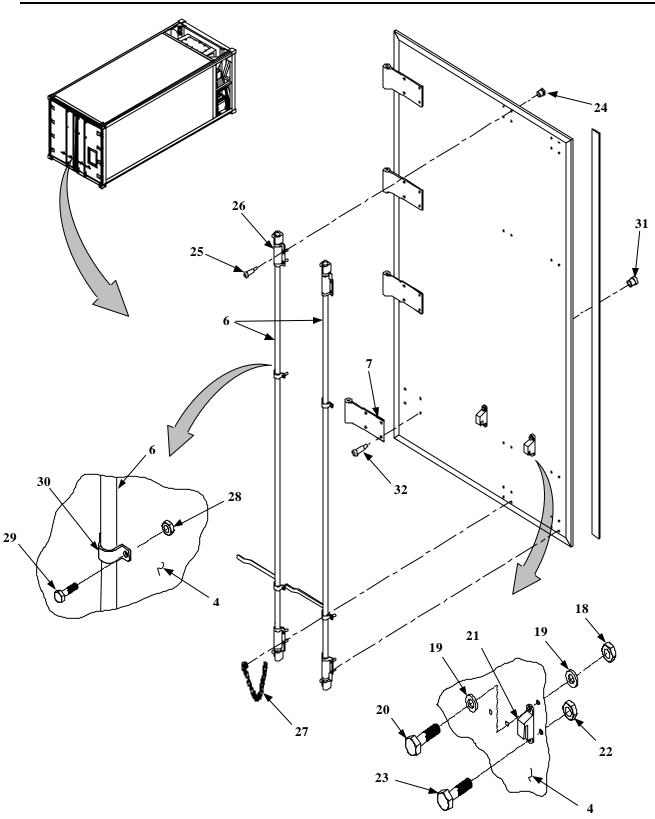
Rear Door, Left – Disassembly (Sheet 3 of 3)
